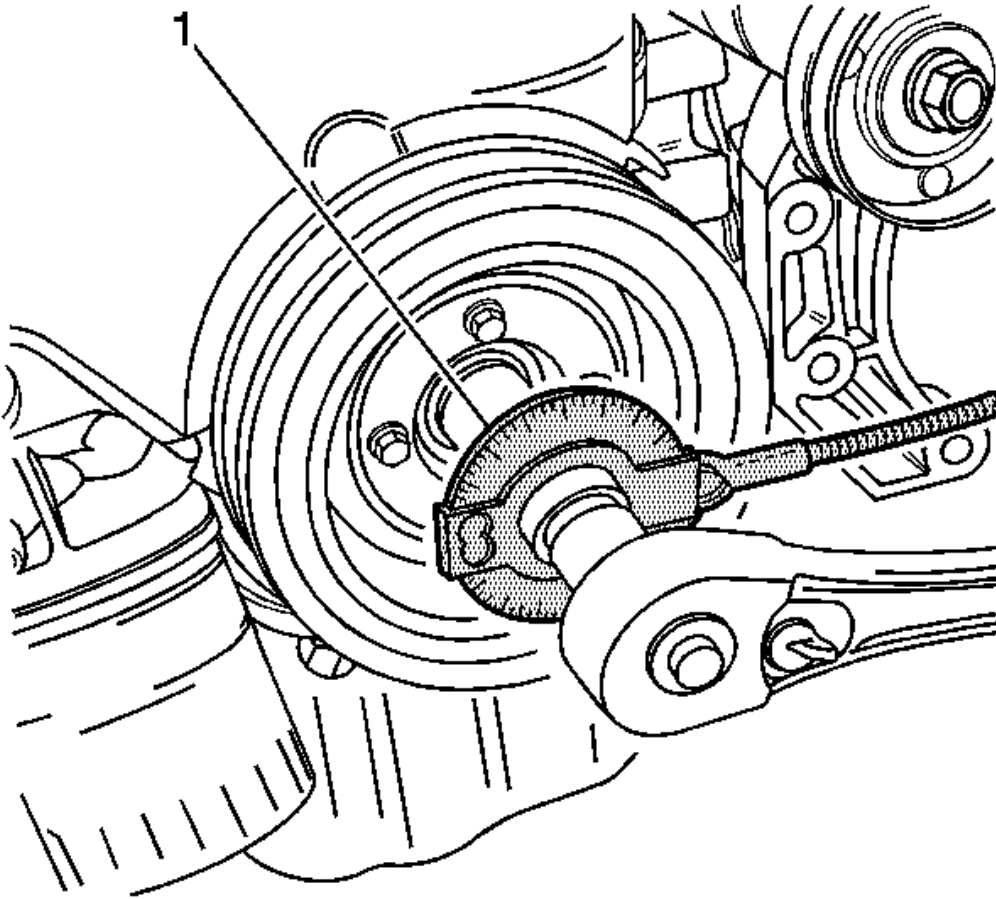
View Of Torque Wrench And Special Tool On Drive Gear Bolt
